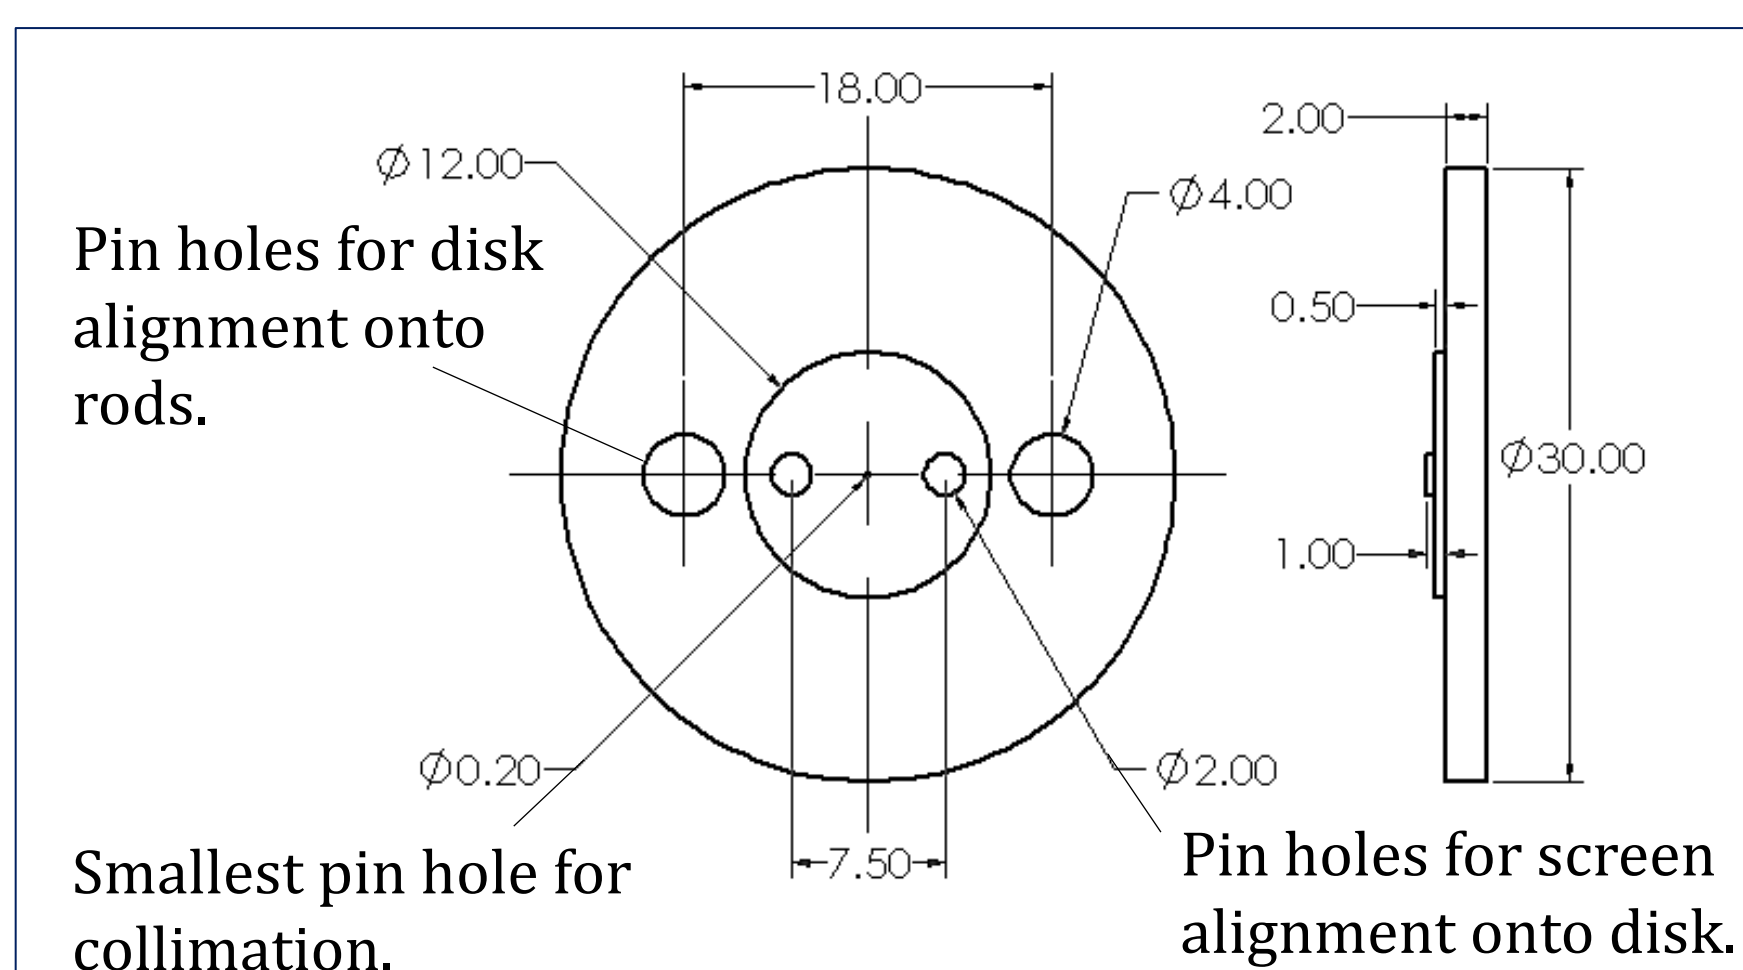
Dimensioned drawing of screen and disk assembly. Figure 5 helped determine how many of these subassemblies we would need, their thicknesses, and center hole diameters to produce a 0.2mm spot size. We chose to make these two separate parts, so we could have a thick supporting disk and still be able to get the small center pin hole we need. The screen is aligned onto the disk using two pins and will be attached using epoxy.
